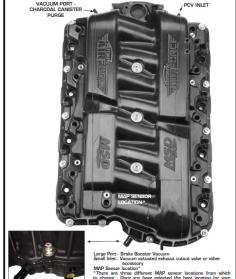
Rear Vacuum Ports and MAP Sensor Mounting Location (1 of 3 shown)
